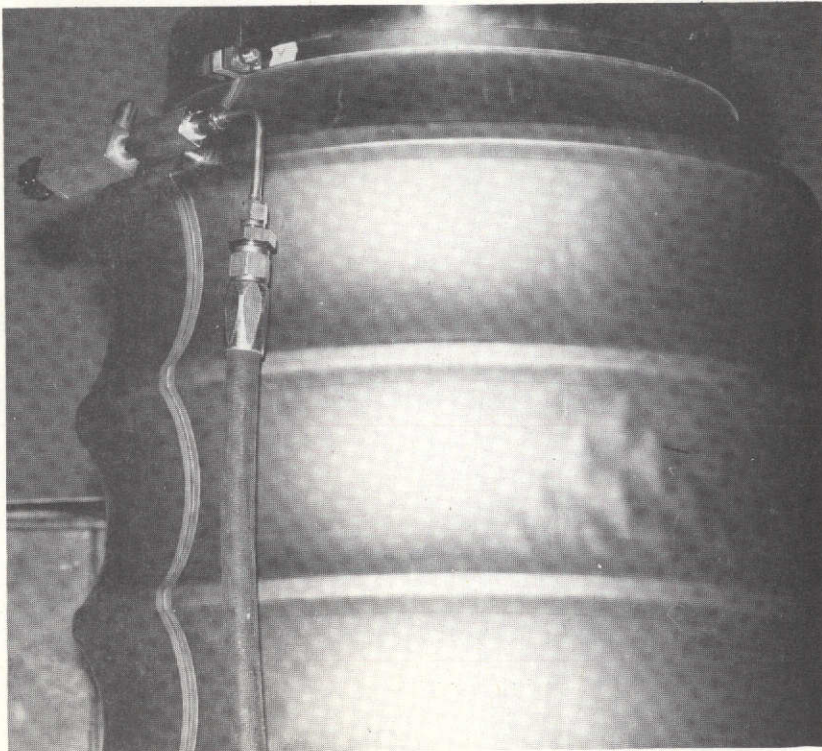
Assembly #1, 711 mm (28 in.) Hg Vacuum Pressure
